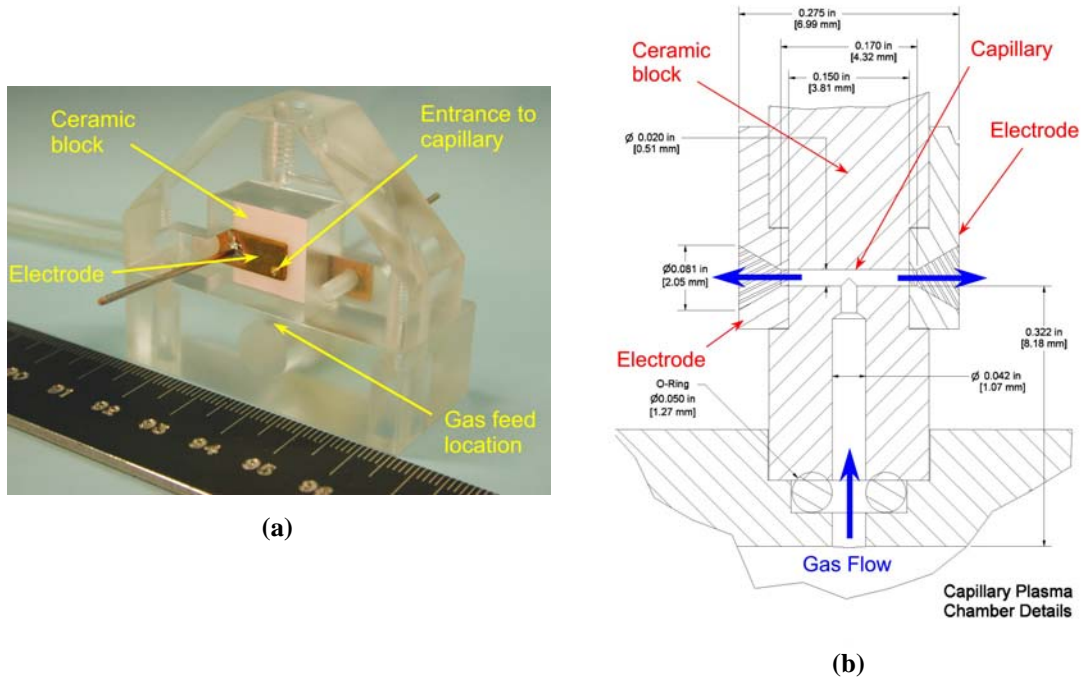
(a) Photograph of assembled gas-filled capillary showing ceramic block secured to acrylic mounting fixtures. (b) Cross-sectional, close-up view of assembled gas-filled capillary shown in (a).
